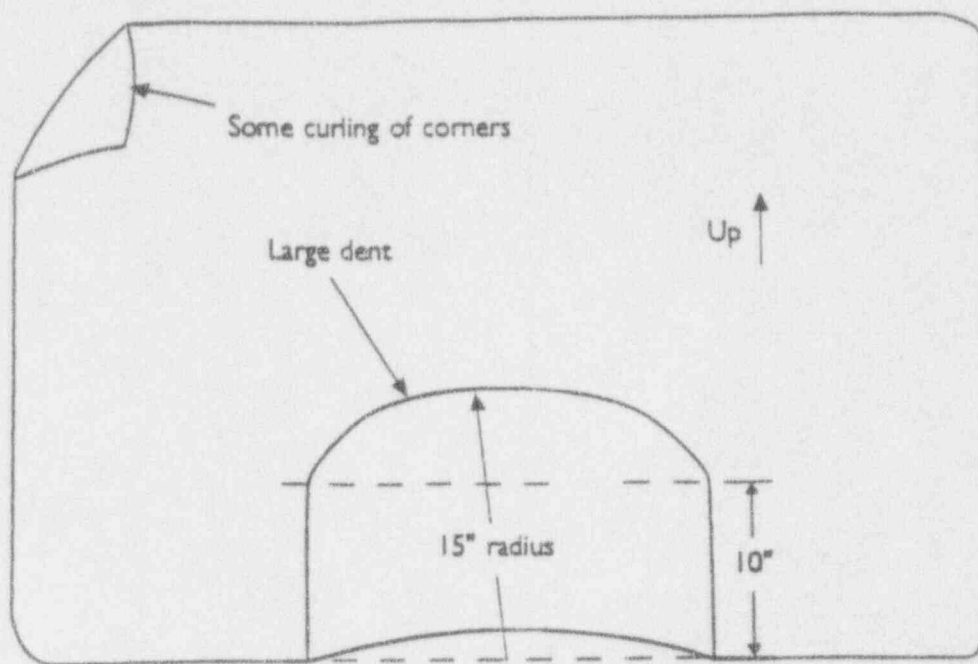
Surface View of Metal Jacket Section 2 after Test 3
